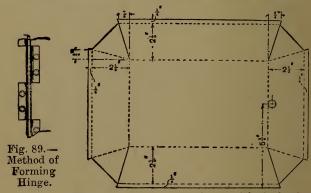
Pattern for Boiler for Picnic Outfit.
